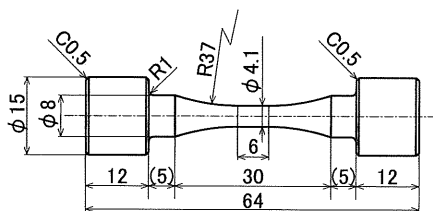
Specimen geometry of uniaxial fatigue tests.
